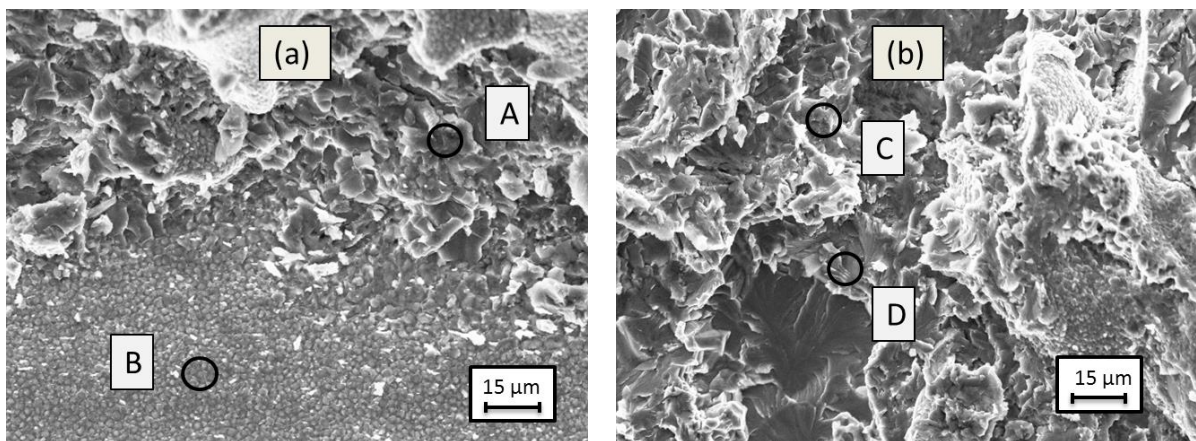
Fracture surface at the mid thickness for samples (a) 4 (1.75 kW-1.8m/min-0.75mm) and (b) 6 (1.5 kW-1.8m/min-0.75mm).
